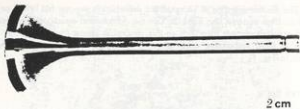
FeAl inlet valve obtained by: extrusion + electro-upsetting and forging.
